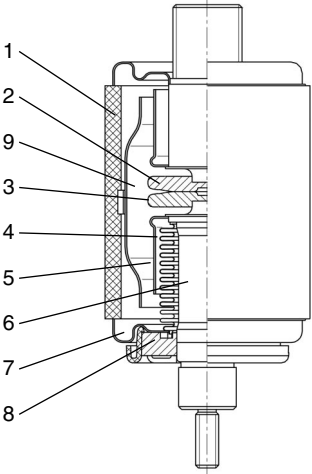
shows the most important components of a vacuum interrupter of the ABB range in sectional view. All joints of the conducting path and of the enclosure are manufactured by brazing in vacuum furnaces with inserted brazing material rings. This results in an extremely reliable and long-lasting seal.
